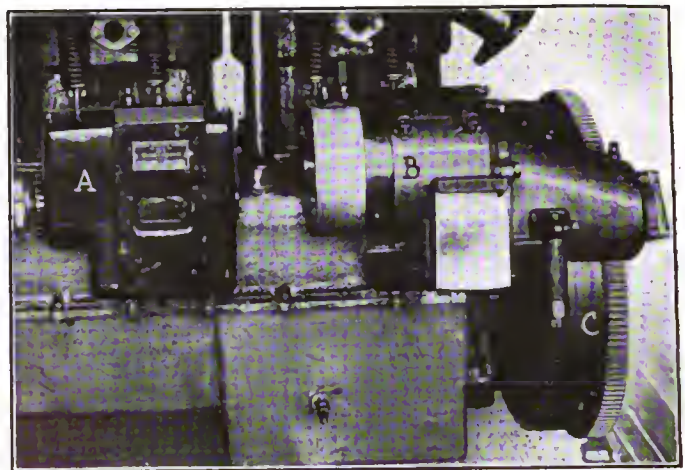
The installation of the Locomobile cranking motor B on flywheel C
